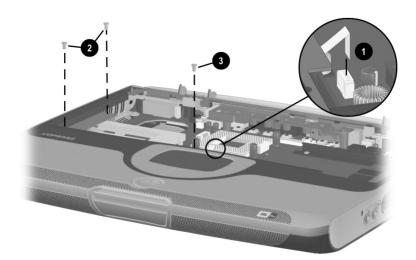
Disconnecting the TouchPad Cable and Removing the Top Cover Screws
